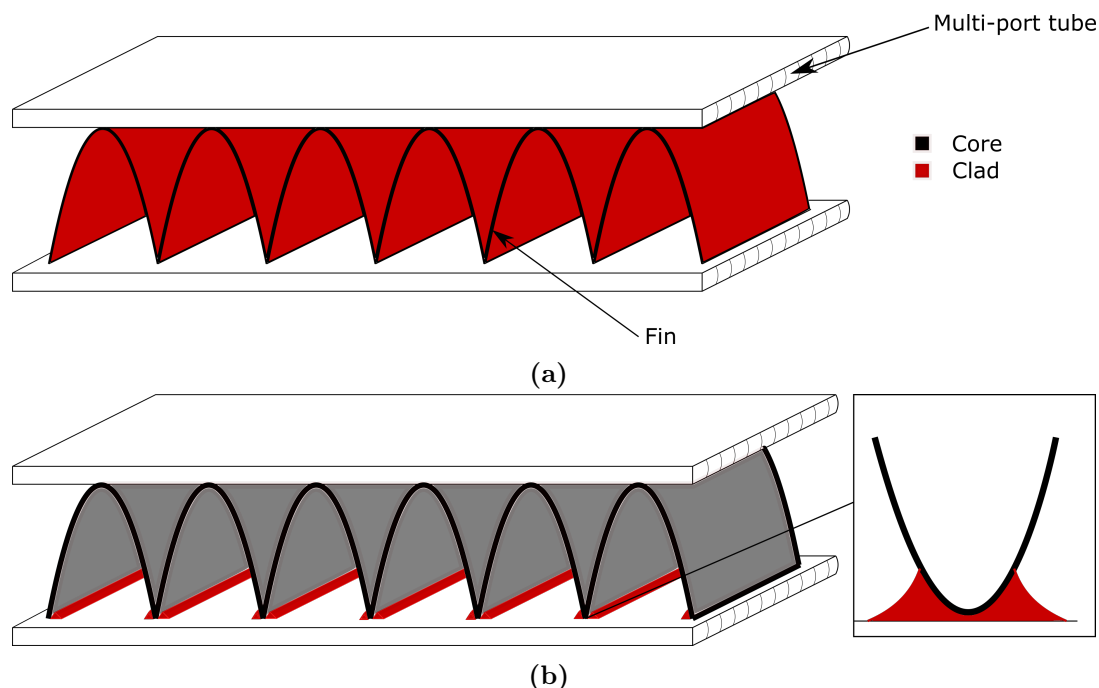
(a) Before brazing a sandwich structure with core and clad is assembled. (b) The clad material has melted and joined the fins and tube together.
